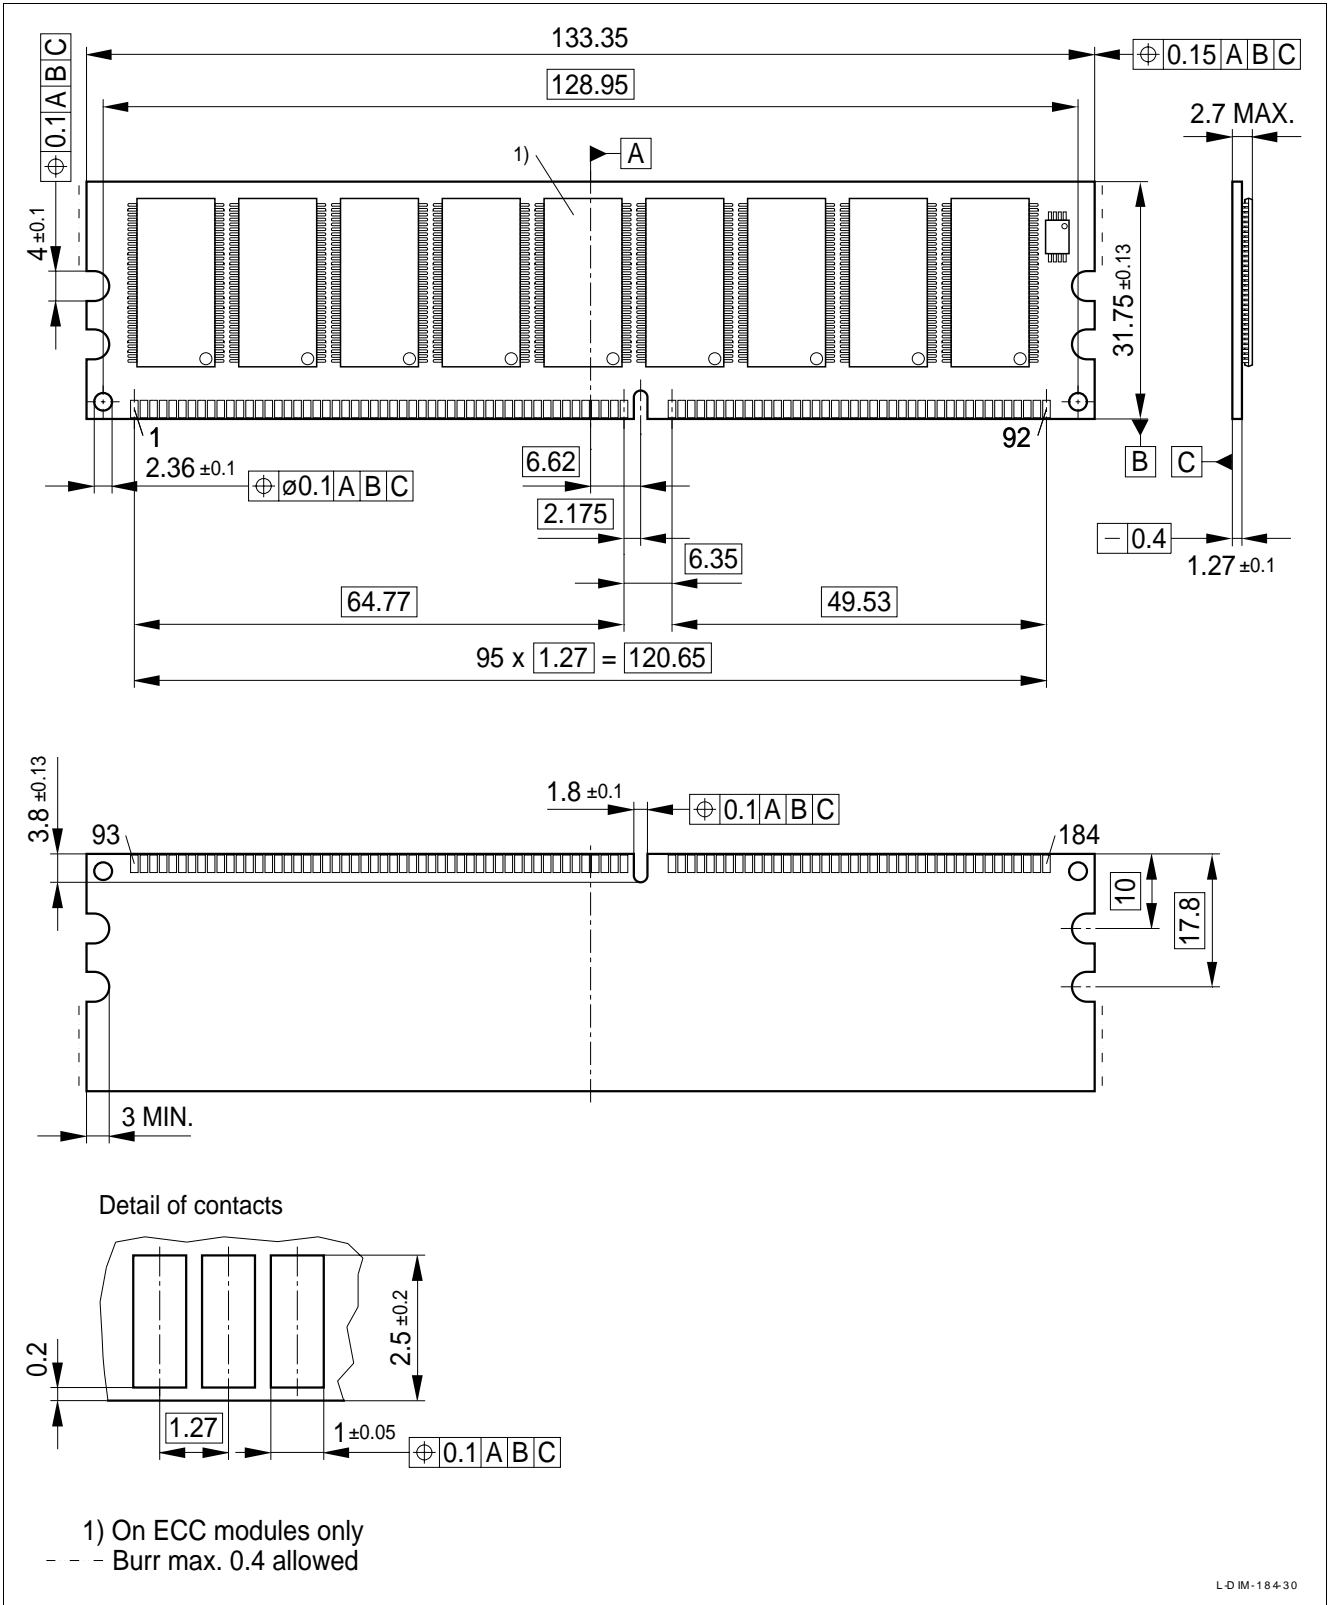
Package Outline - Raw Card A (256 MByte, 1 Rank Module, -5 and -6, ECC)
